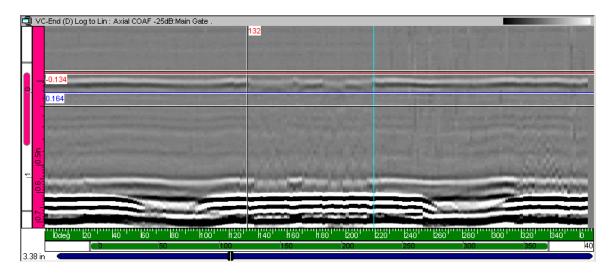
"X"-Shaped Indications in the Penetration Tube
